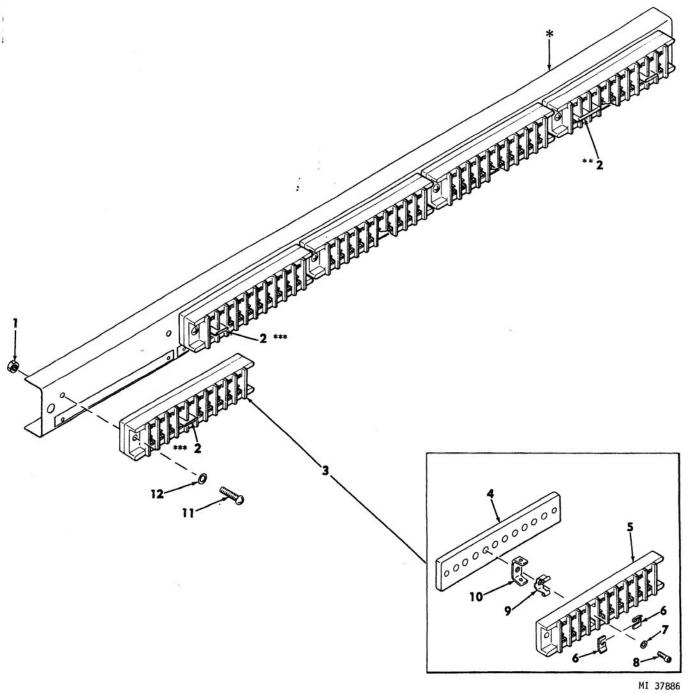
CONNECTOR, PLUG, ELECTRICAL ASSEMBLY /11067515 /SEE FIGURE 23 FOR NEXT HIGHER ASSEMBLY/
